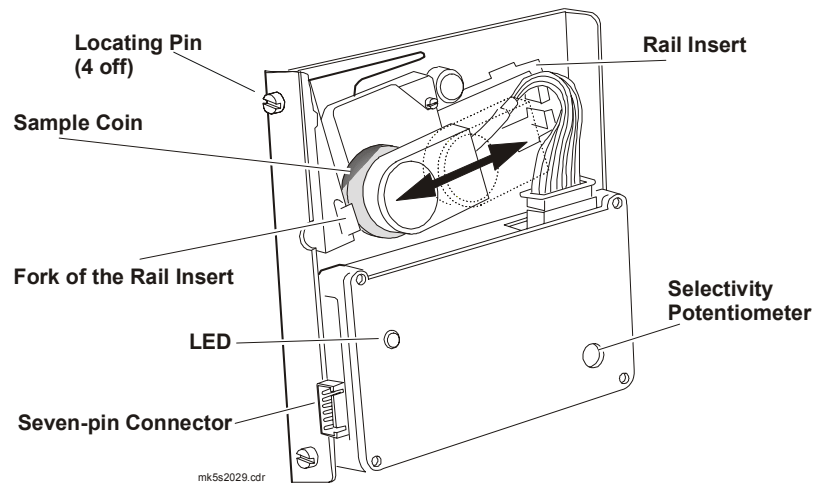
Coin Comparator Assembly (MC-62 shown)
